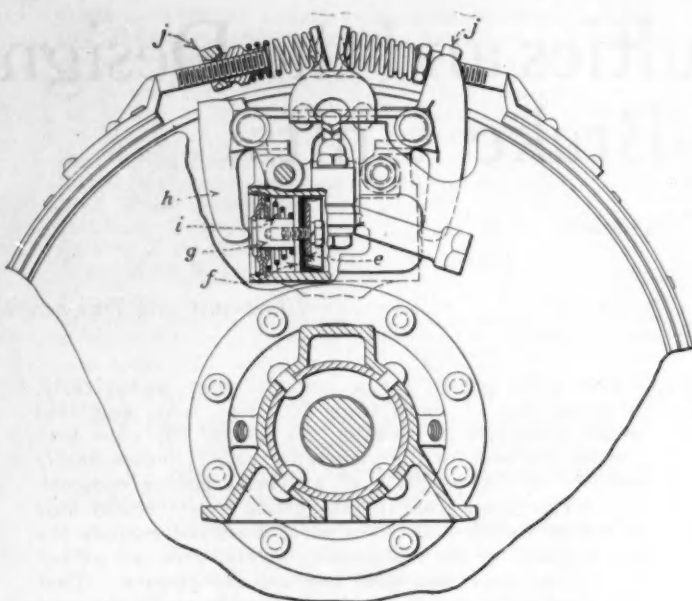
DESIGN OF ENCLOSED WHEEL-CYLINDER
